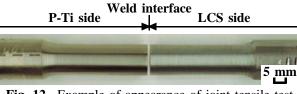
Example of appearance of joint tensile test specimen with weld interface fracture after tensile testing.
